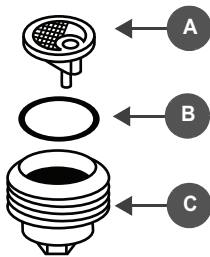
Fuel Sediment Cup Assembly Pieces
